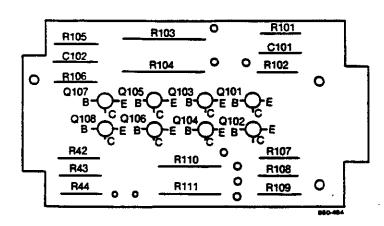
220/240 V - Printed Wiring Board Assembly (Triac Drive)
